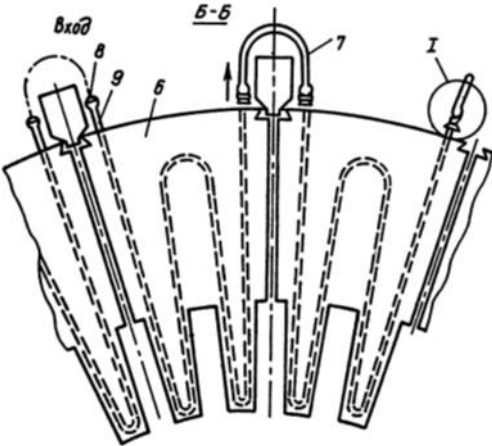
Stator Steel Coolers with Connecting Tubes.
